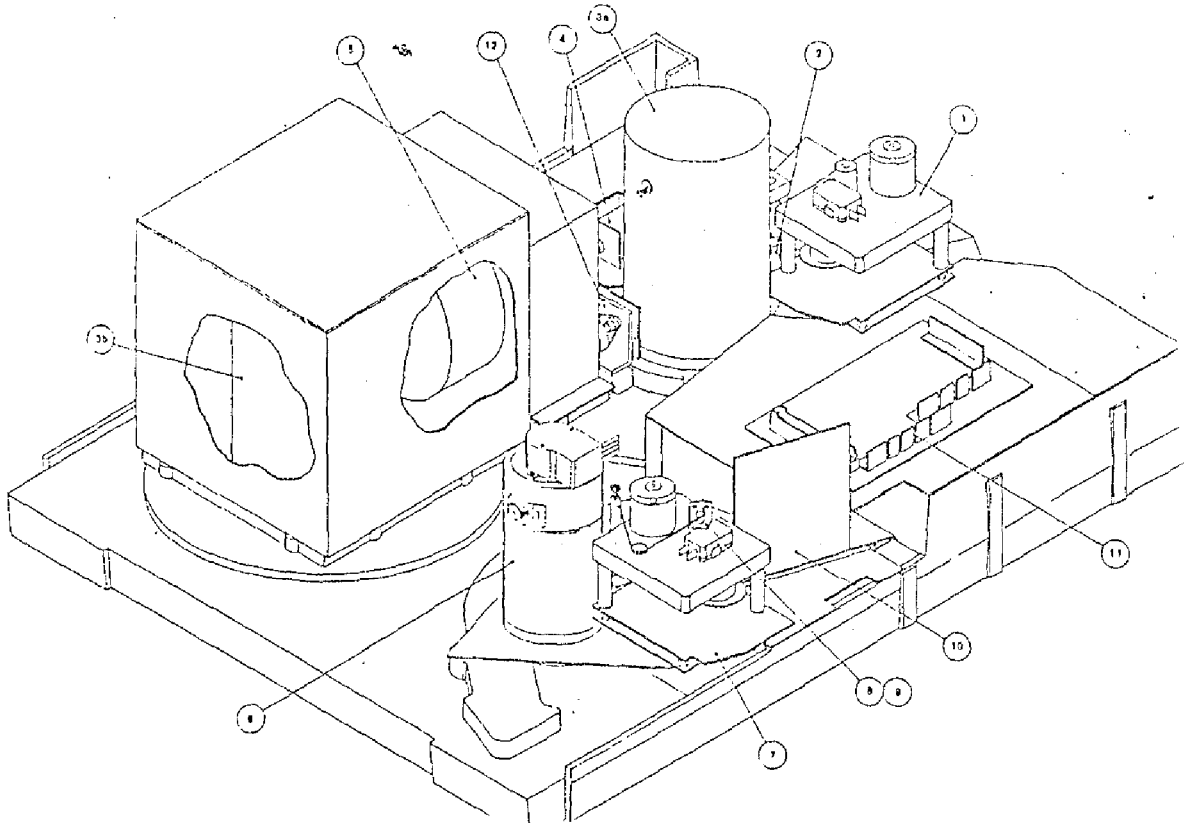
Deck Assembly, Top View (Sheet 1 of 2)
